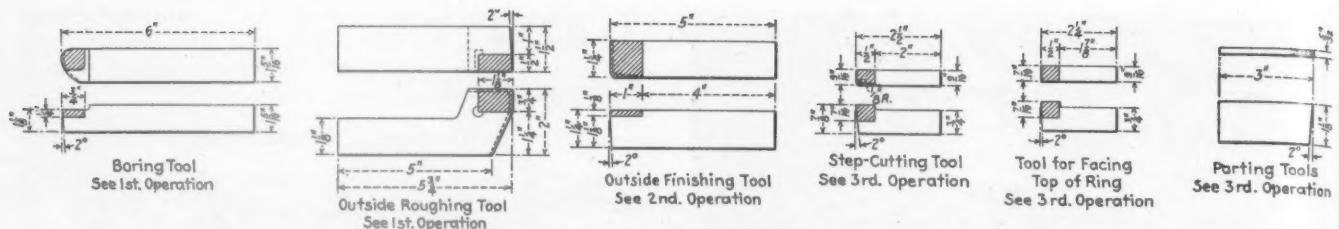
Stellite-tipped tools used in valve-ring production at West Albany—From left to right these tools are the boring tool, outside roughing tool, outside finishing tool, step-cutting or recessing tool, facing tool, and all-stellite parting tool. The operations refer to Fig. 4
